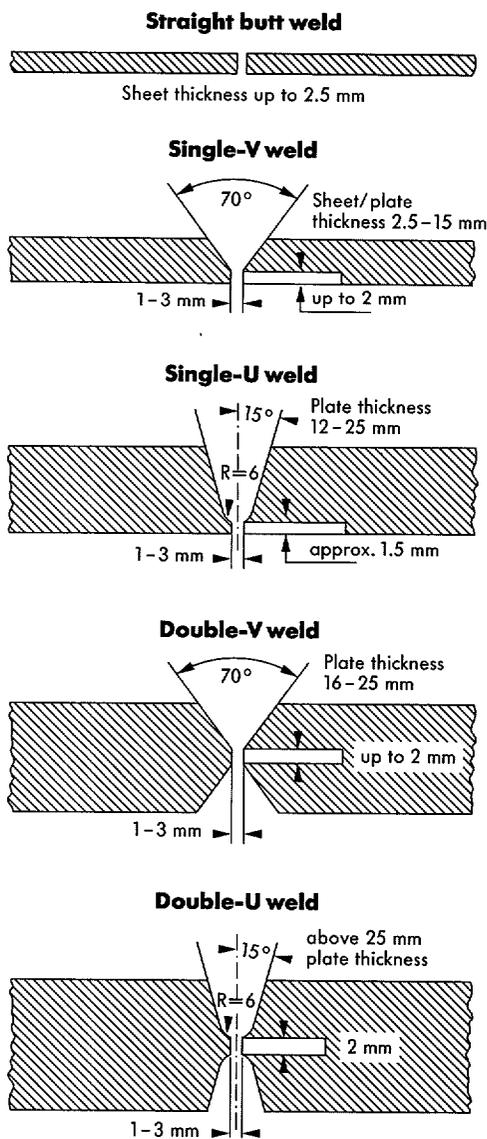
Edge preparation for welding of nickel, nickel alloys and special stainless steels.
